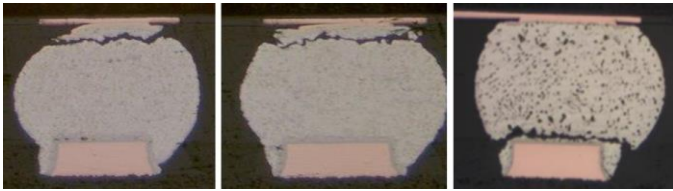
Cross-section microscope images showing solder joint cracks due to thermal fatigue and caused by the accelerated TC load.
